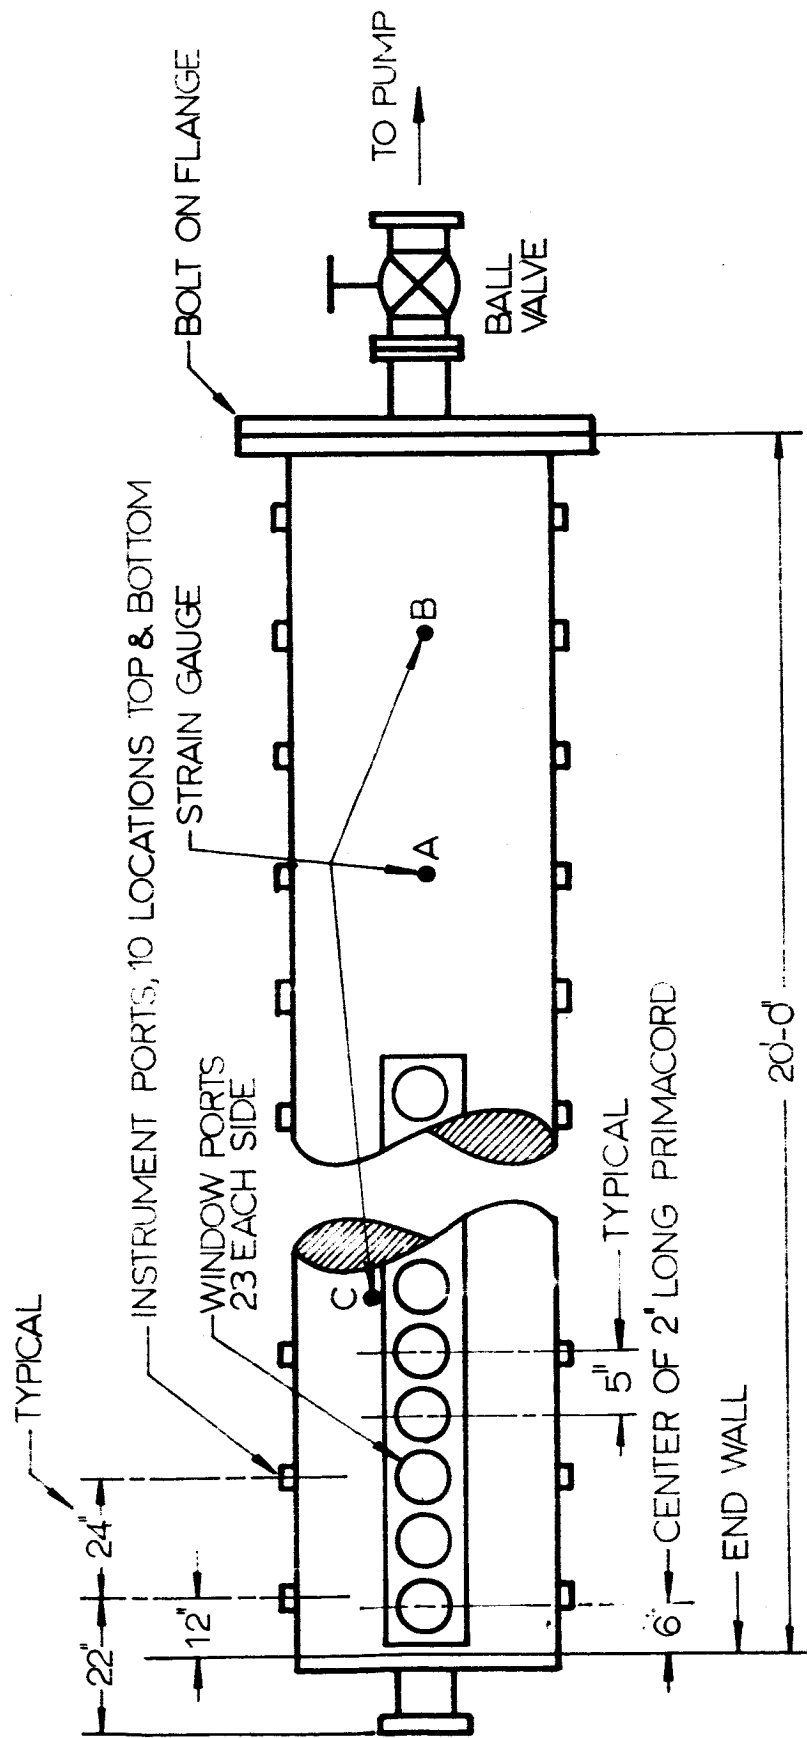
Layout of Vessel CD showing locations of instruments and important dimensions
